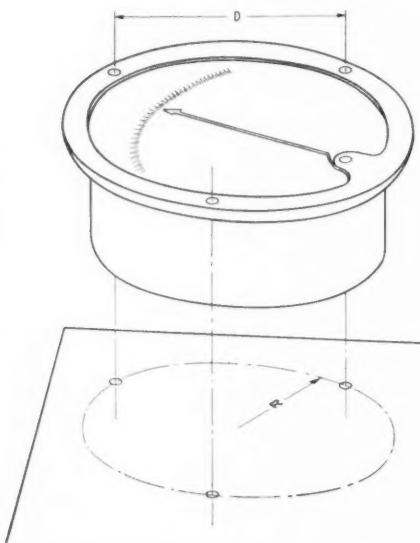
Spotting the mounting holes for a meter has always been a tough job. Here's a simple way that will result in cleaner-looking gear for you.
